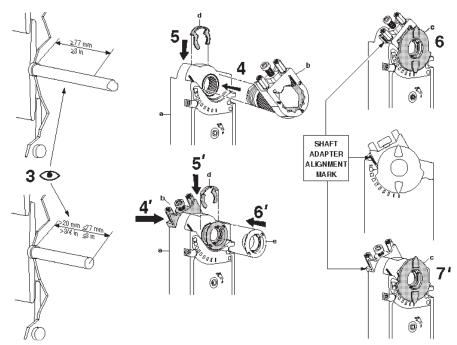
Shaft Length and Proper Shaft Adapter Location.
